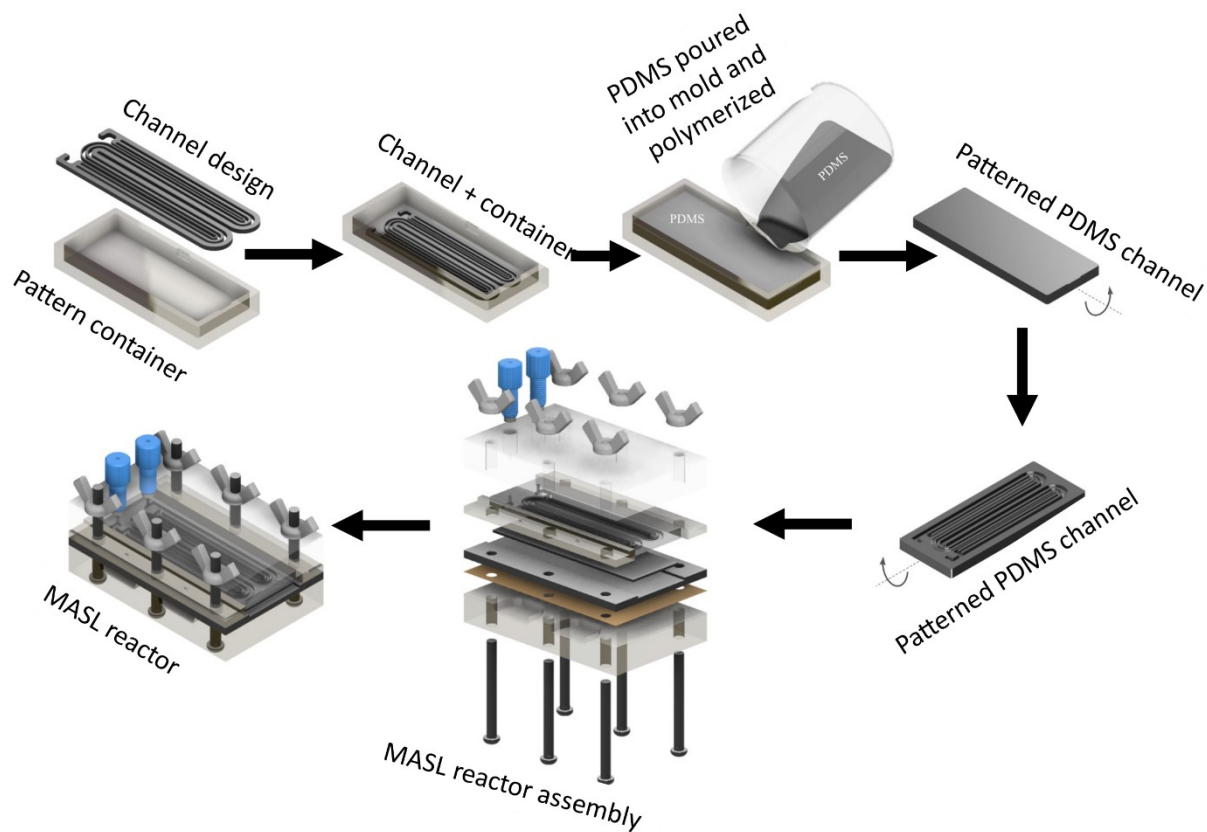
Process schematics for fabricating MASL reactor assembly.
